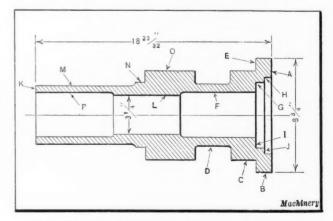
Heavy Worm Quill Forging which is turned and faced all over and drilled, bored, and counterbored
